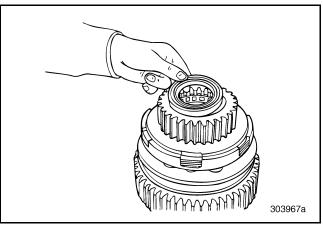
Inserting Ball Bearing (T313L/T318L Shown)
